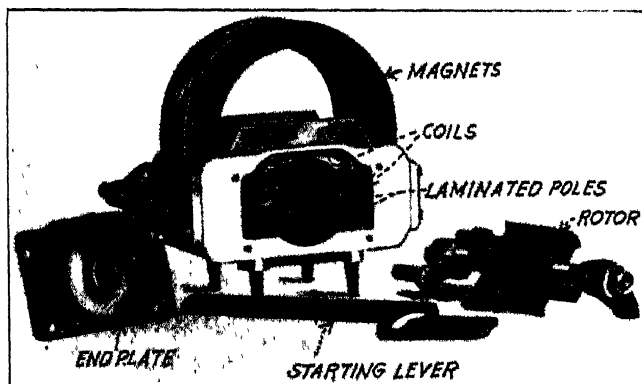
Disassembled view of Webster tri-polar oscillator magneto.
